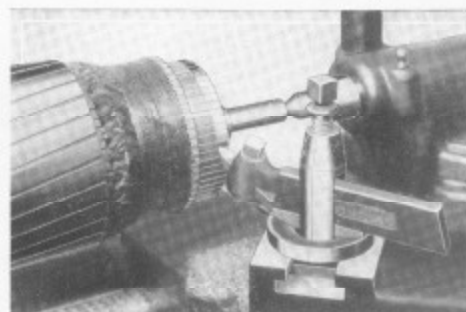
Truing an armature commutator in the lathe. Price: 3 Blue Prints, 4 Job Sheets, 85c.
